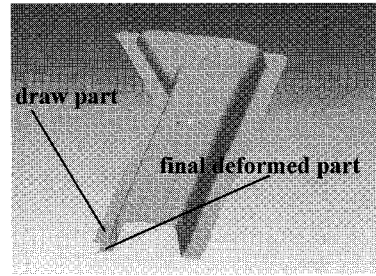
Difference of shapes between draw part and final deformed part due to springback
